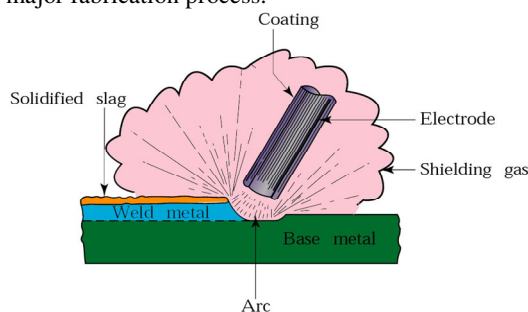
Principal Of Metal Arc Welding.
